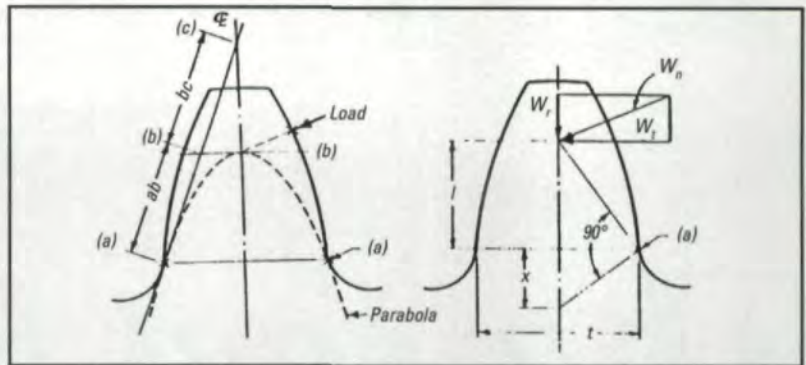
Inscribed parabola on gear tooth section. Courtesy of Technomic Publishing (Ref. 1).
